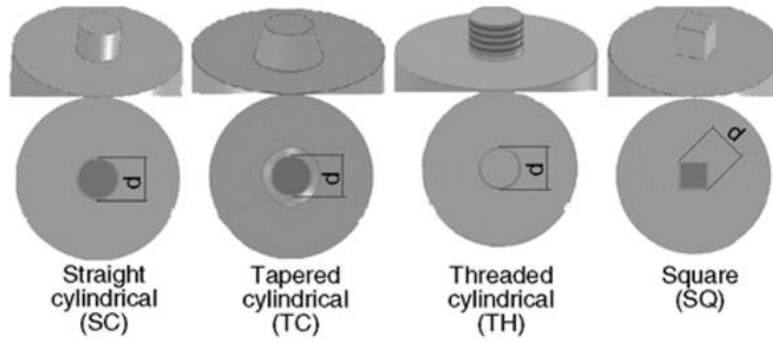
FSSW tool pin geometries and diameters (d) [52].
